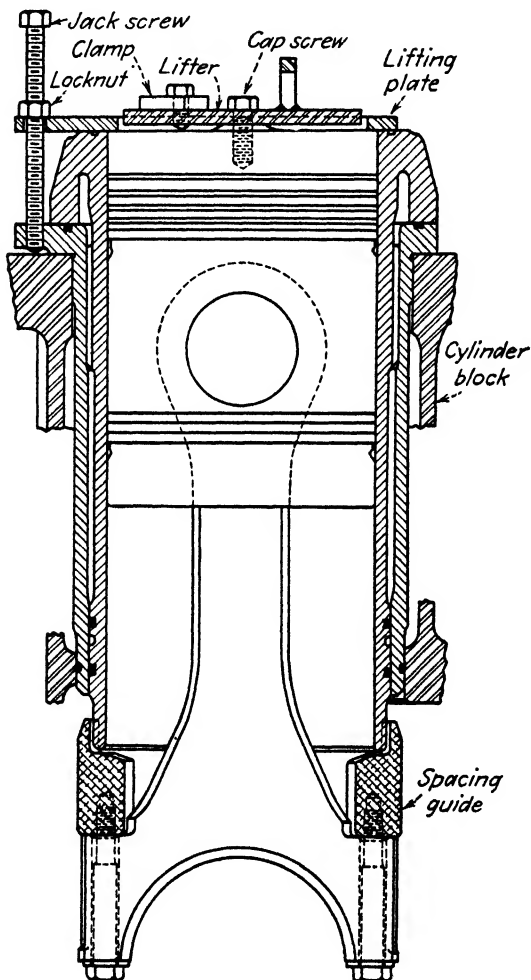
SHOWING METHOD OF REMOVING CYLINDER, LINER, PISTON AND CONNECTING ROD FROM BLOCK.
